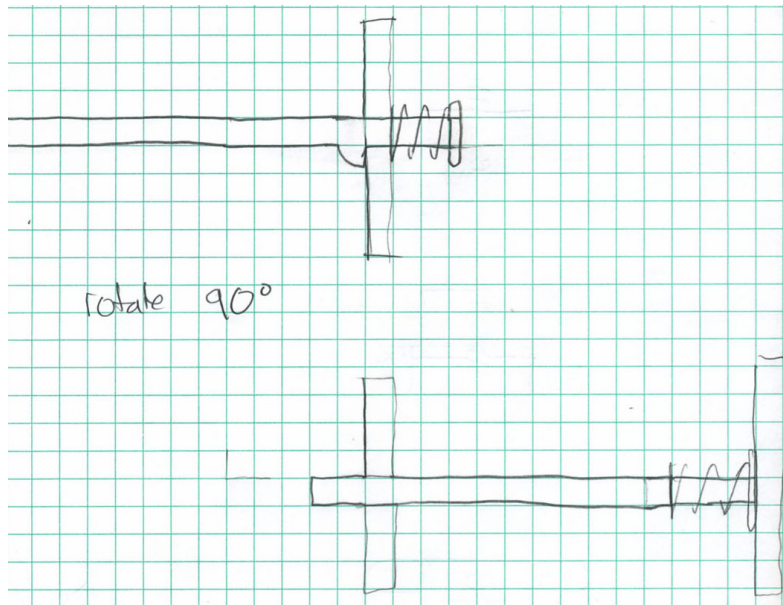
Drawings of Sharp/Natural Adjustment Pin (SNAP)
